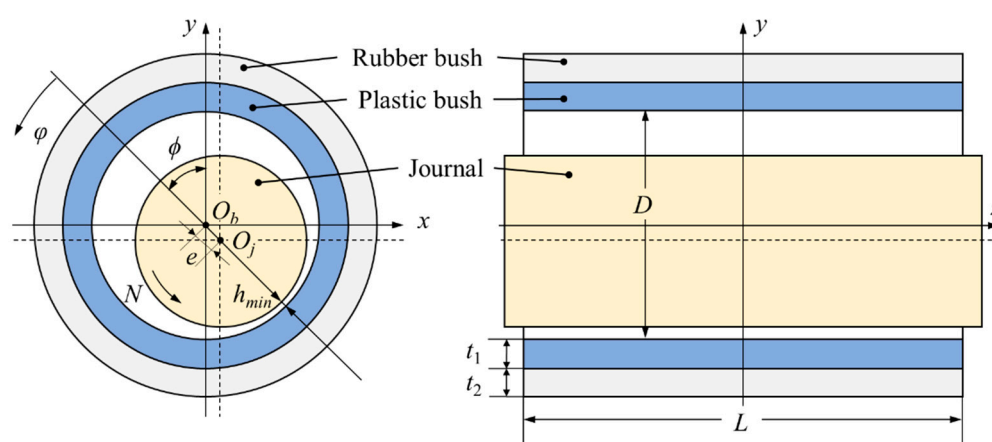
Rubber-plastic double-layer water-lubricated journal bearing geometry.
